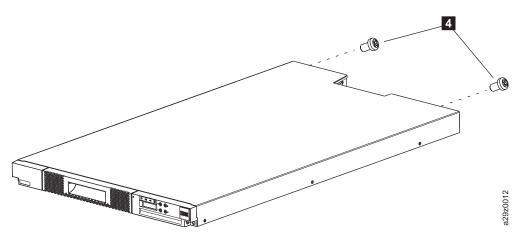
Removing screws from the rear of the library the cover to the library chassis (rear screws)
